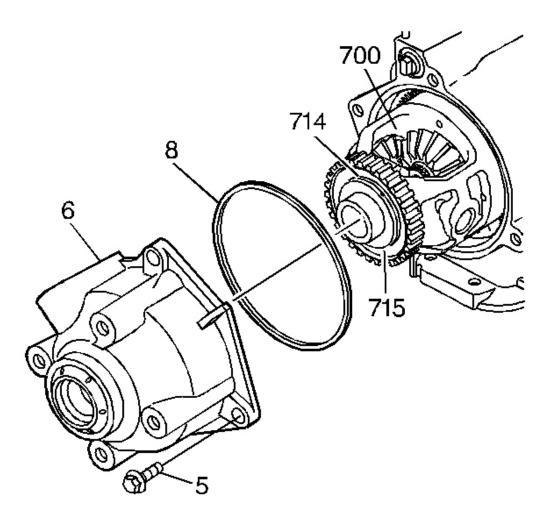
View Of Case Extension Assembly & Bolts Courtesy of GENERAL MOTORS CORP.
